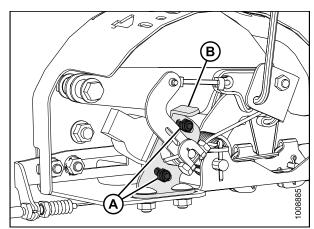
10 Volt AHHC Sensor Assembly for Use with Some New Holland Combines
